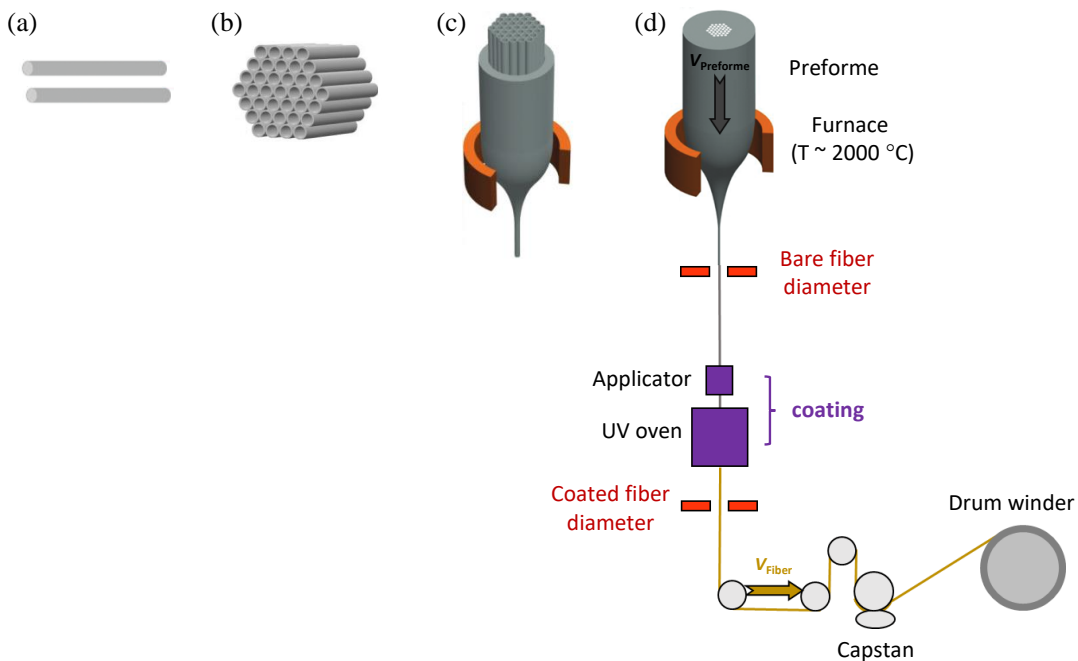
(a) Prepare Ge-doped silica rods (b) Stack rods in hexagonal (c) draw the canes (d) draw the fiber
